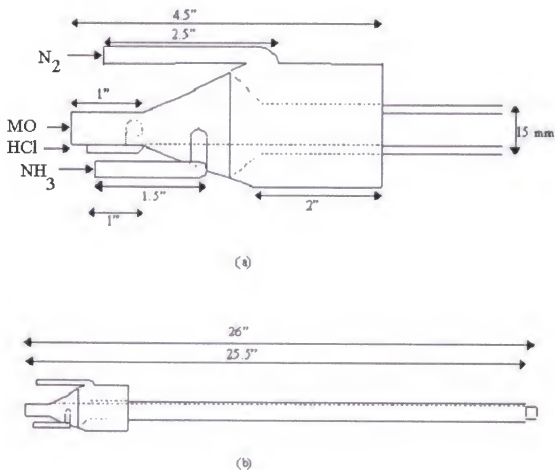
(a) Close-up view of H-MOVPE inlet section, before coupling to reactor. (b) extended view. $\frac{1}{4}$ " MO tube is not shown, for clarity, but is slid coaxially into 15 mm tube at location marked "MO," and secured with Ultratorr connection.
